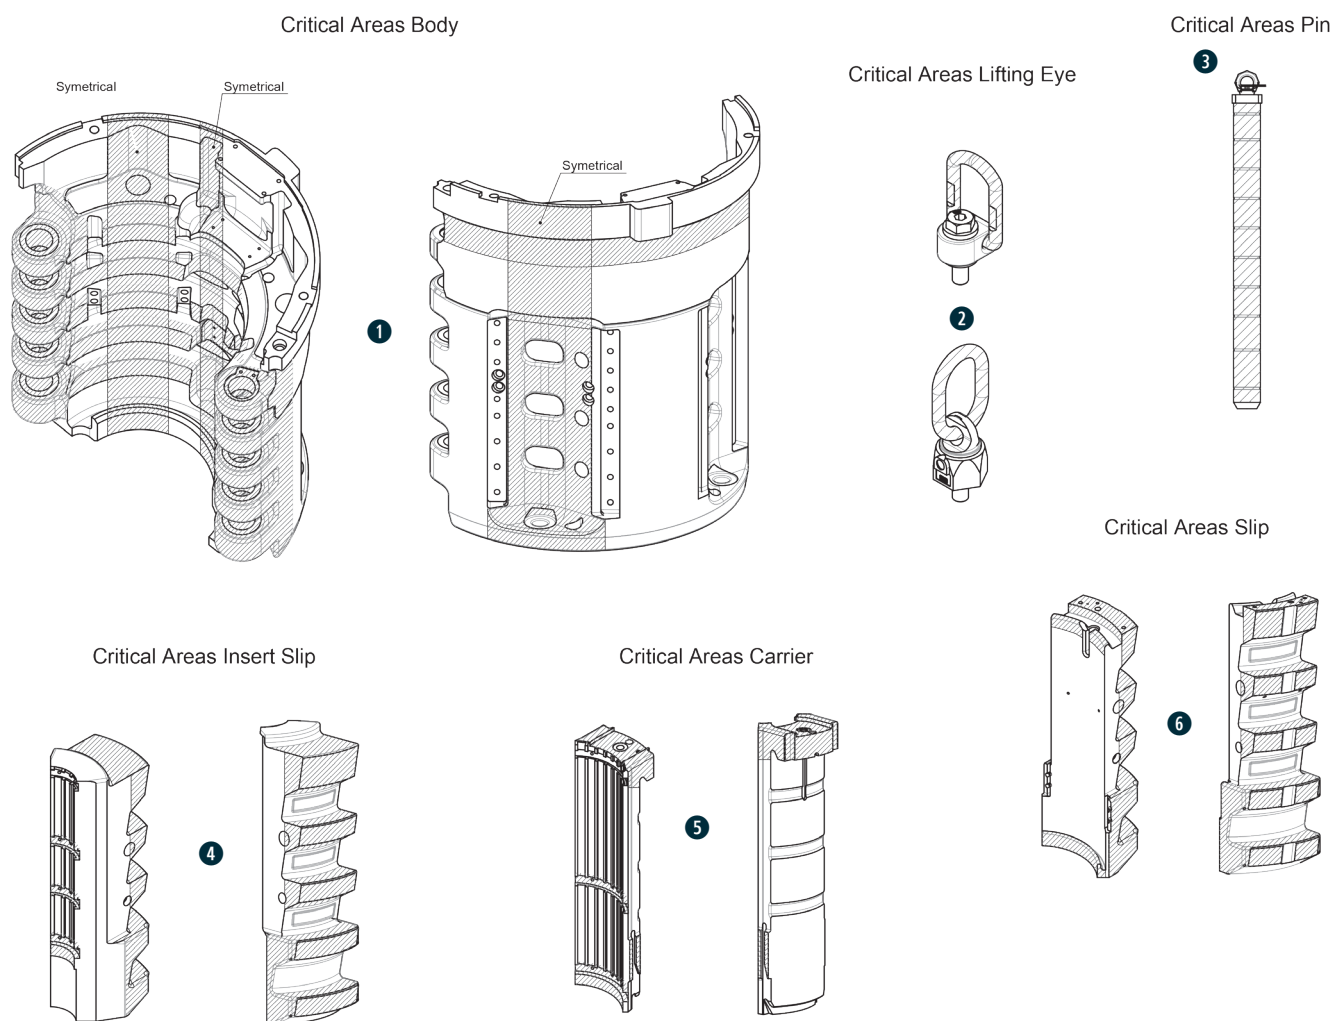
Critical Areas (cf. Inspection Check Lists): ❶ Body, ❷ Lifting Eyes, ❸ Hinge Pin, ❹ Insert Slip, ❺ Carrier, ❻ Slip
